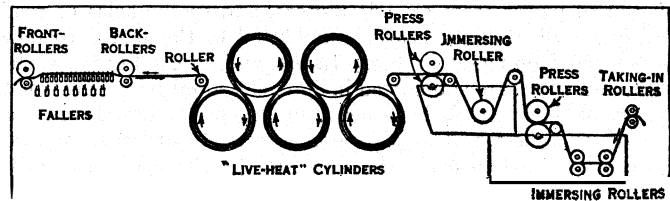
SECTIONAL VIEW OF BACKWASHER
